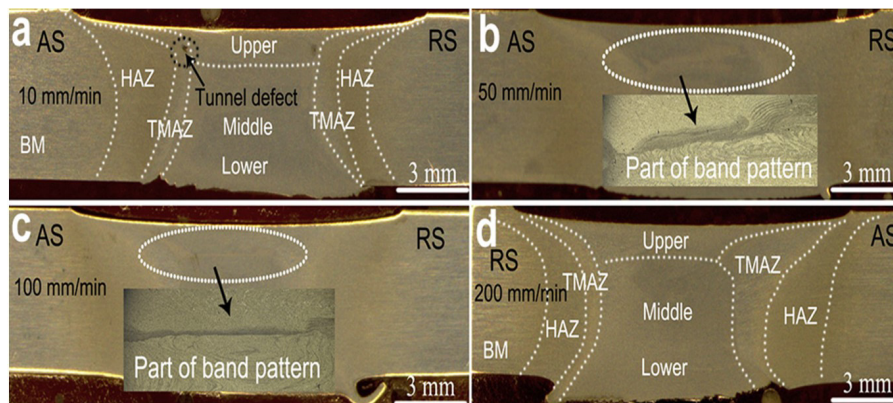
AA6082-T6 macrographs of transverse cross-sections welded by Self-reacting tool at constant tool rotation of 800 rpm and welding speeds of (a) 10, (b) 50, (c) 100 and (d) 200 mm/min (AS: advancing side, RS: retreating side, BM: base metal, HAZ: heat affected zone, TMAZ: thermomechanically affected zone) [172].
